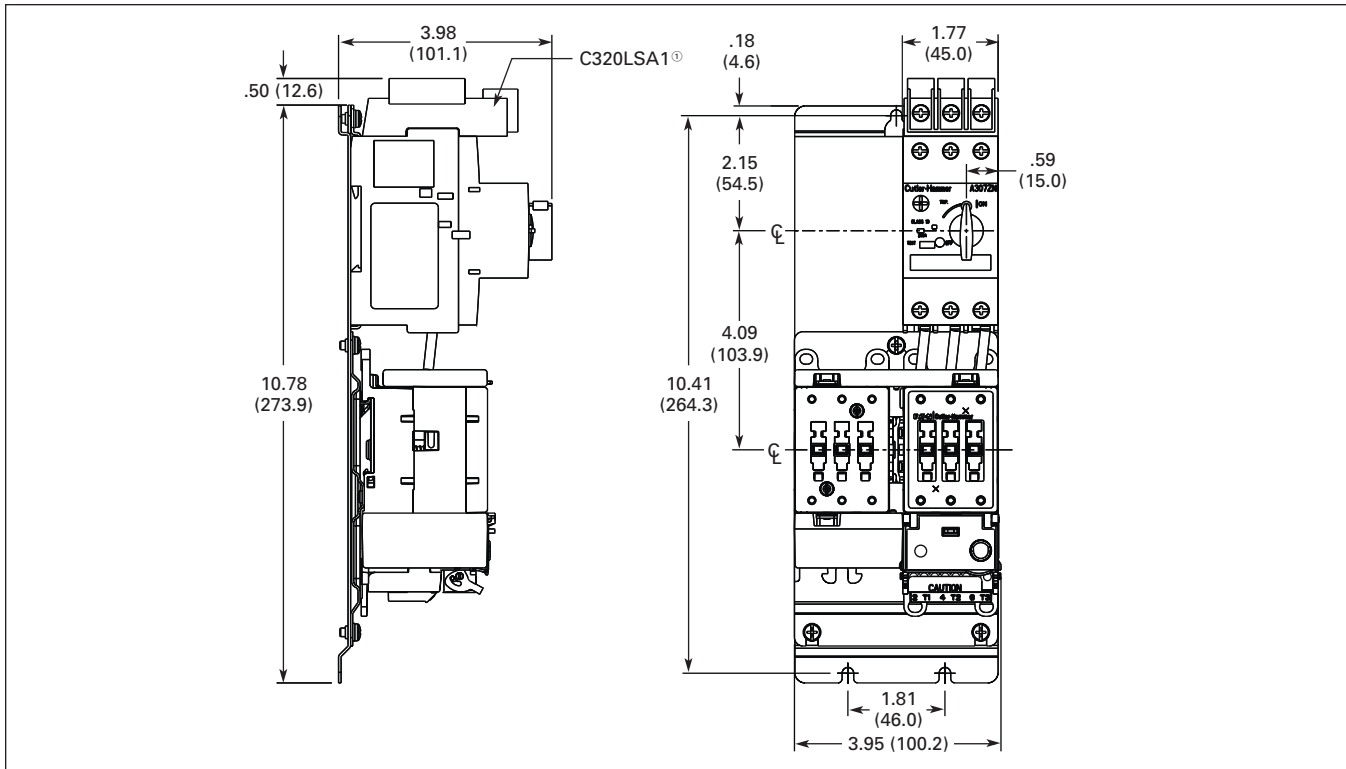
Reversing Manual and Combination Motor Controller (M)N357 (A307 MMP + N511B [Size 00/0] Contactor) — Approximate Dimensions in Inches (mm)
